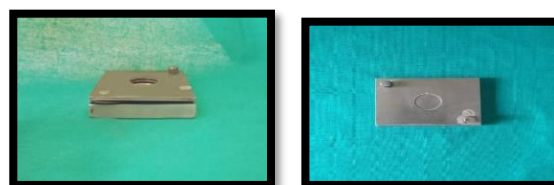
&2: Metal jig for metal ceramic specimens (20mm diameter and 2.5mm thickness)
